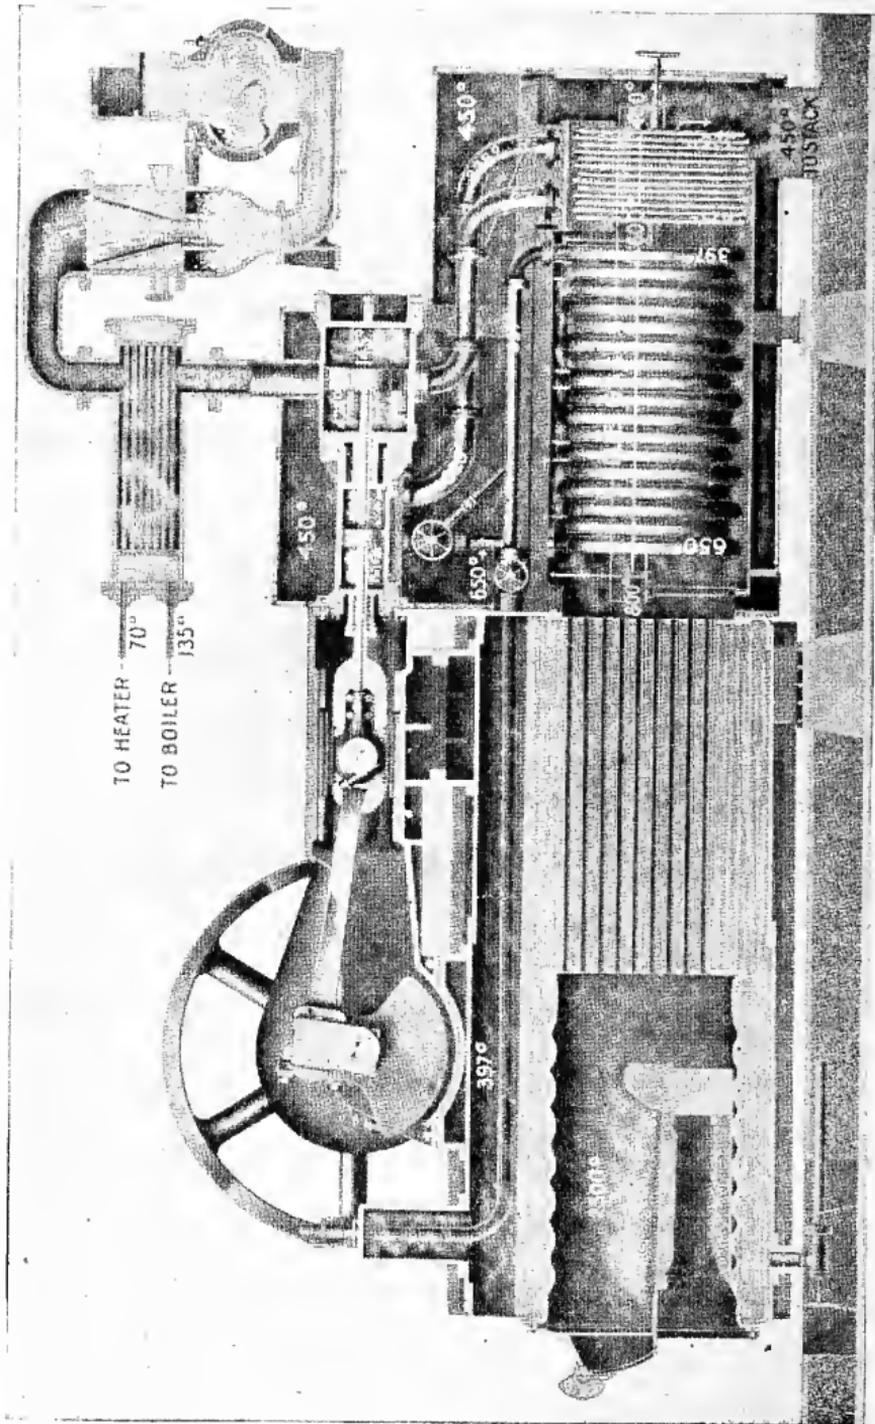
Section of Buckeyemobile Showing Temperatures in Different Parts of the Power Units
